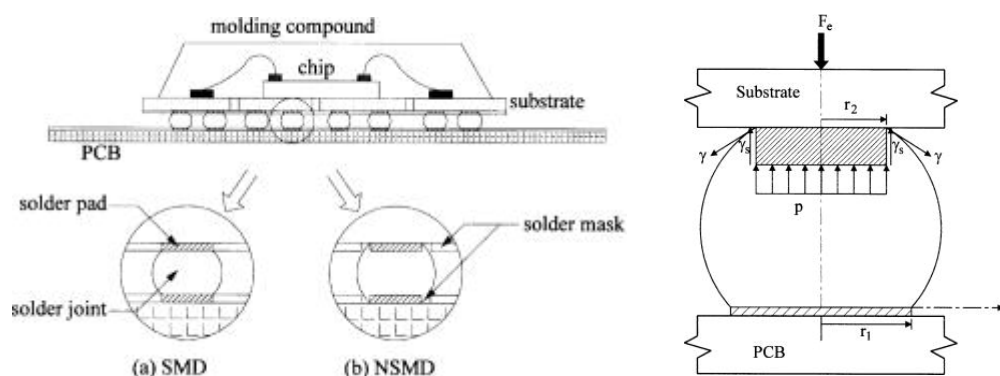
Configuration of BGA package and force balance for the upper pad of a NSMD-SMD solder joint (Chen, et al., 2002)
